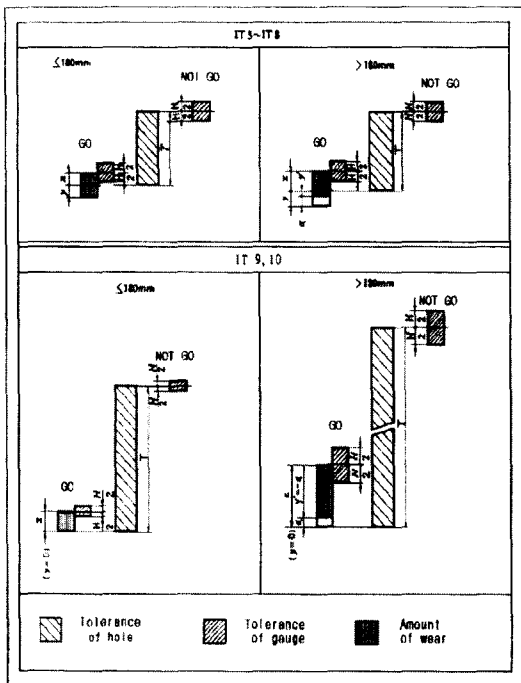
Relation between manufacturing tolerance of limit gauges for holes and workpiece tolerance
